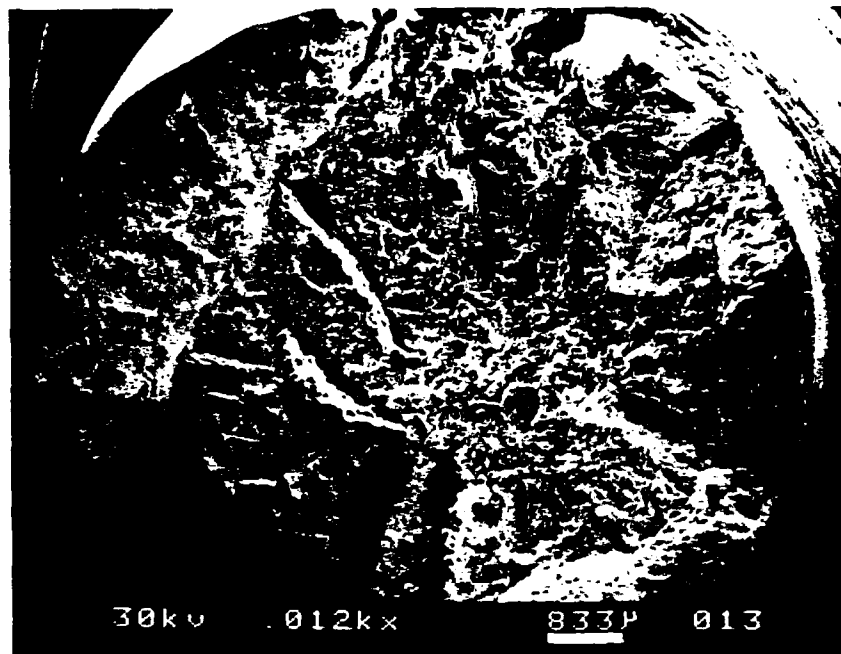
Overall fractograph of HIP fracture surface (12X).
